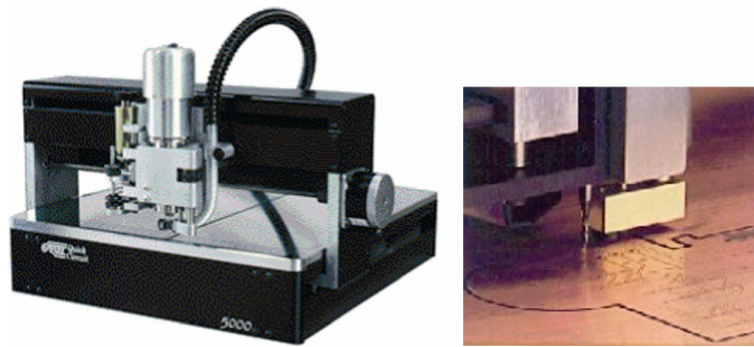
T-Tech Quick Circuit micromilling machine and example of mechanical patterning
